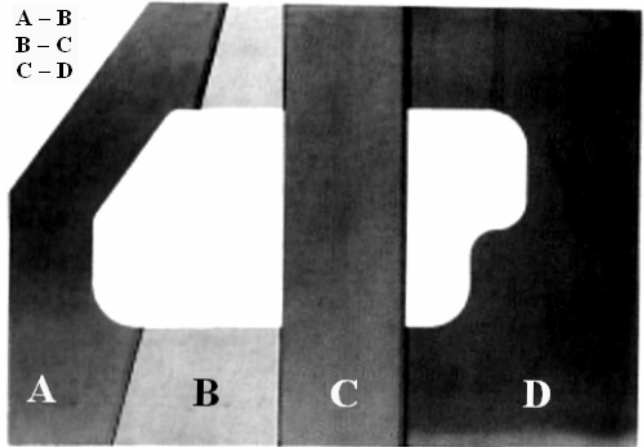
Laser-welded tailored blank composed of sheet strips of A-B-C-D type
